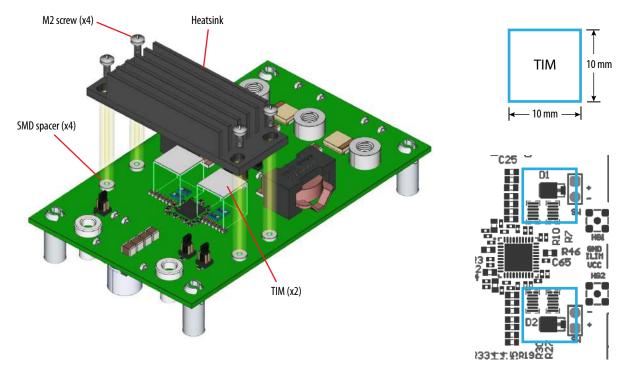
Exploded 3D assembly of heat sink installment and locations of TIM material
